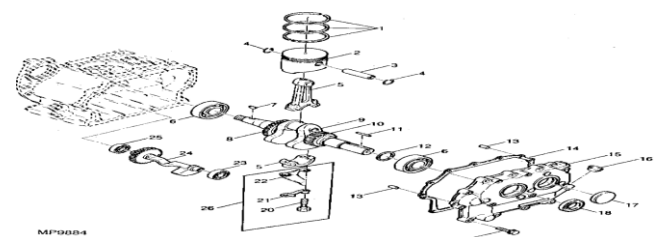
Exploded view of a single cylinder engine showing the crank shaft mounting in the engine.
